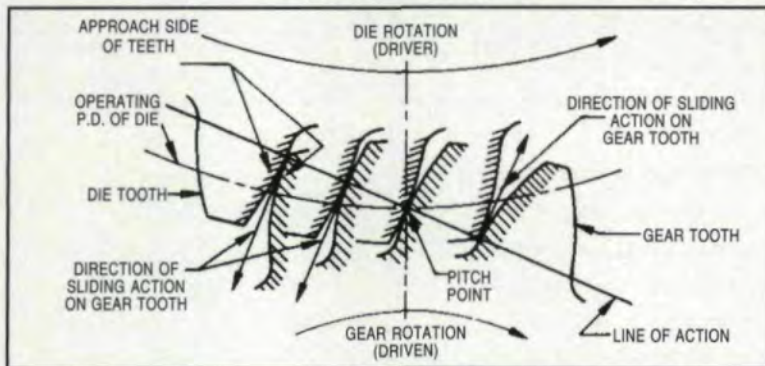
Contact action between one tooth of a work piece and the approach side of a rolling die tooth.
